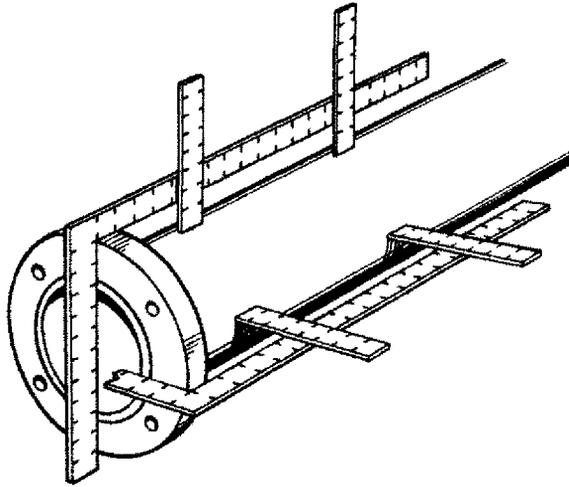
Method of aligning a flange perpendicular to the axis of the pipe to which it is to be welded.
